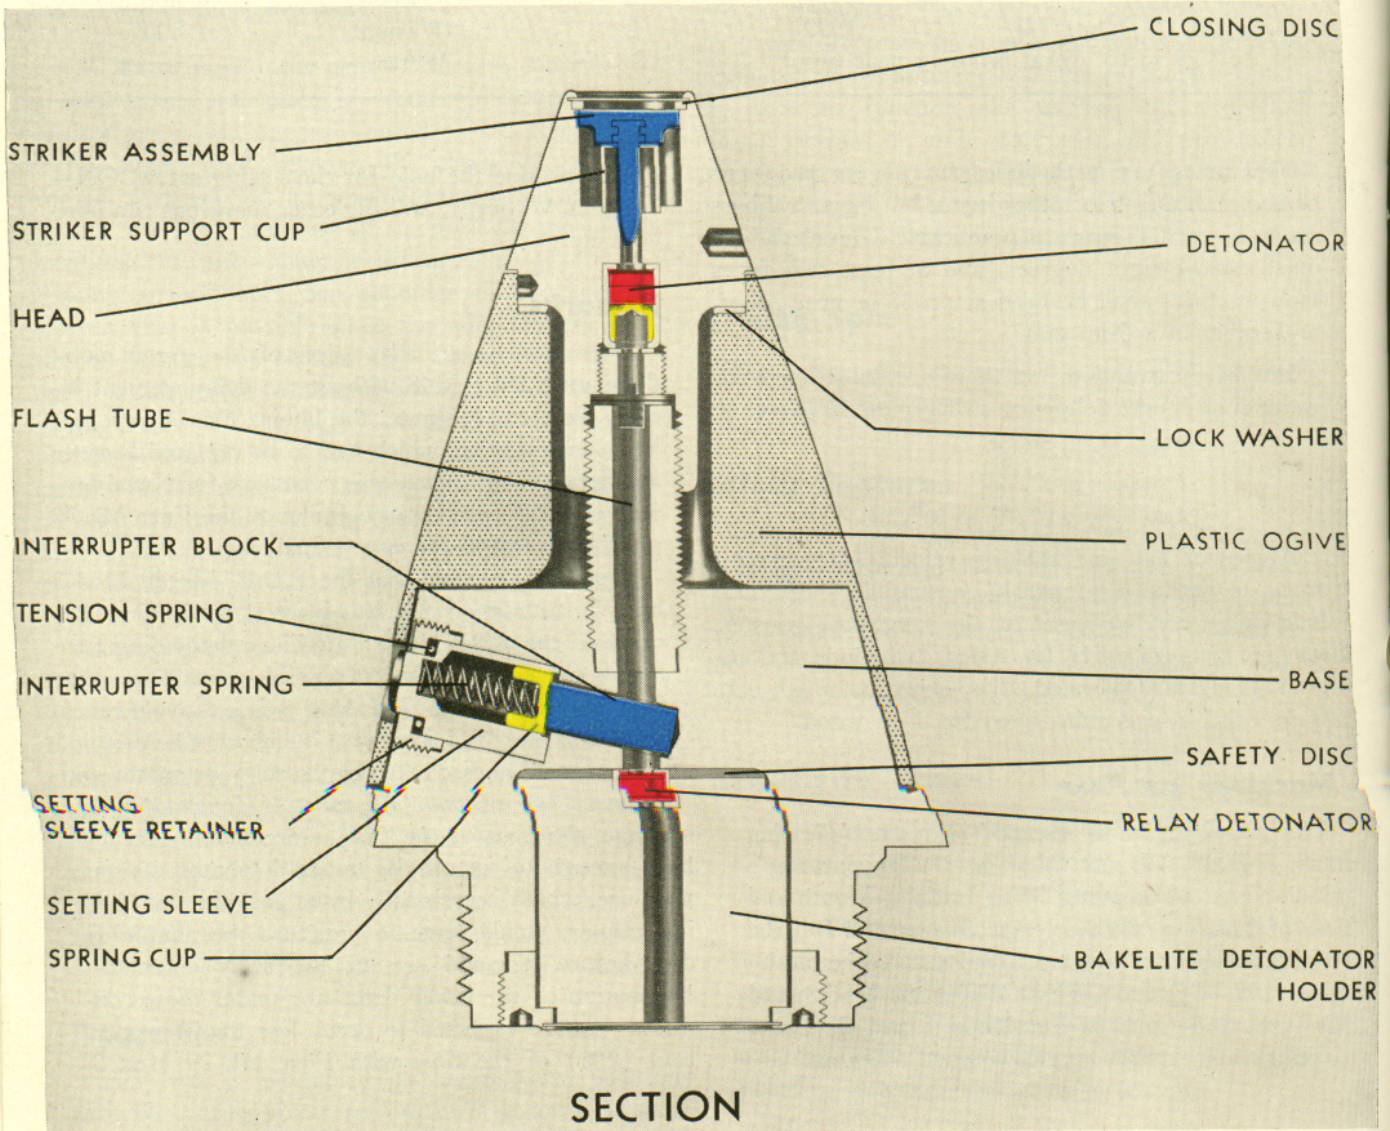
Point Detonating Fuze Mk 30—Sectional View
